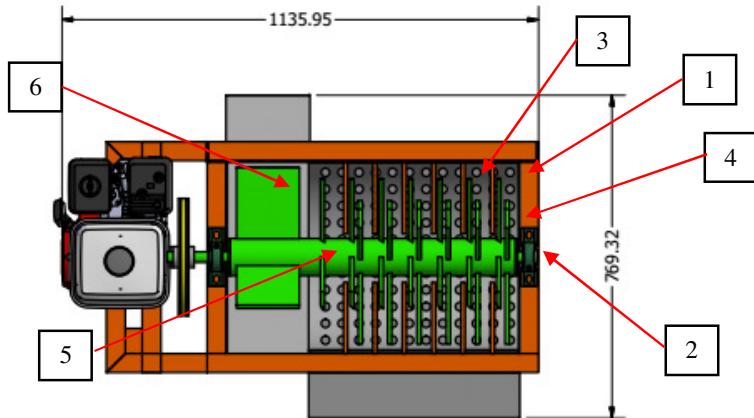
Top view design without the cover of coconut coir crusher machine. 1. filter, 2. pillow block bearing, 3. static blade, 4. dynamic blade, 5. blade shaft, 6. pusher fan
